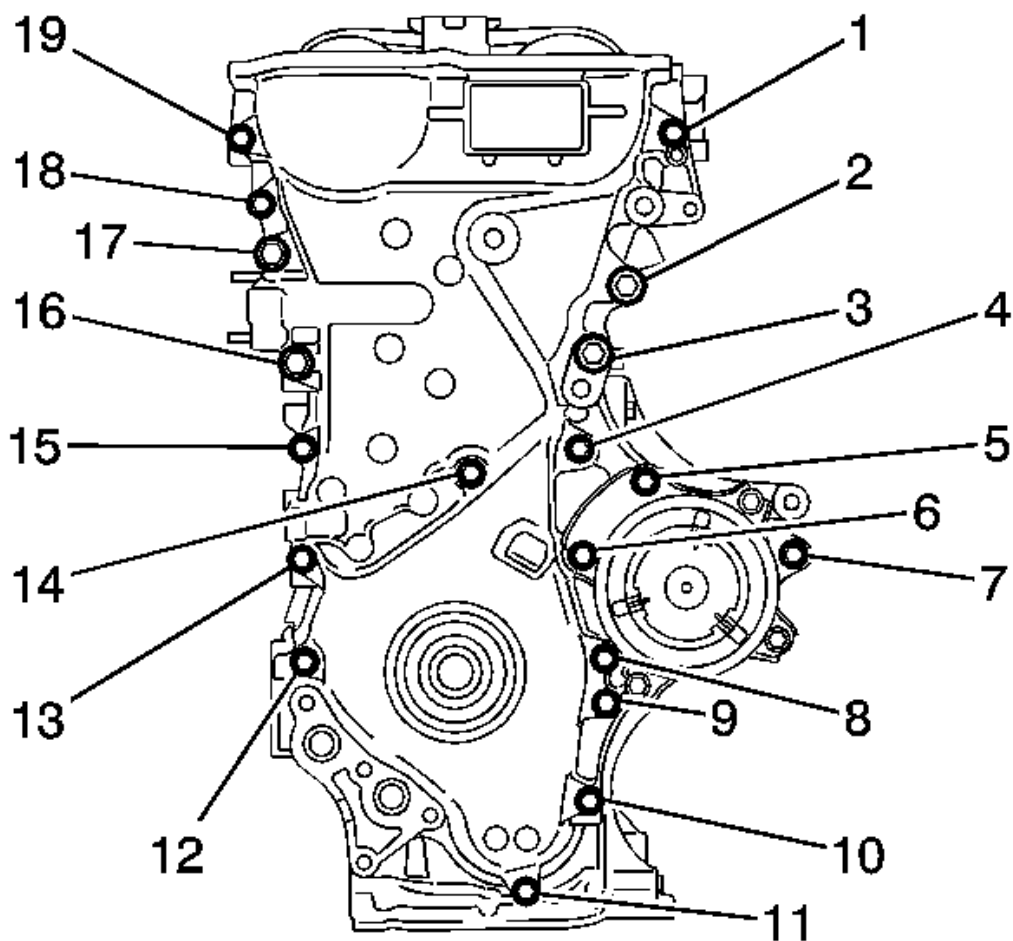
Identifying Front Cover Bolt Loosening Sequence
